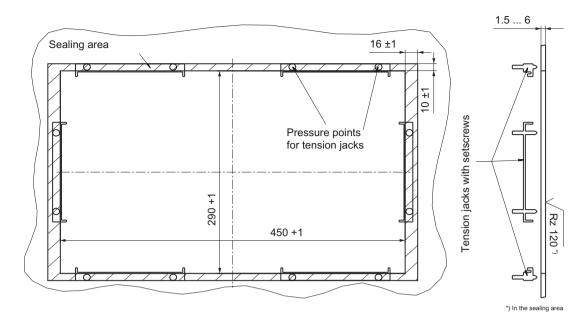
Dimension drawing for mounting the OP015 operator panel front
